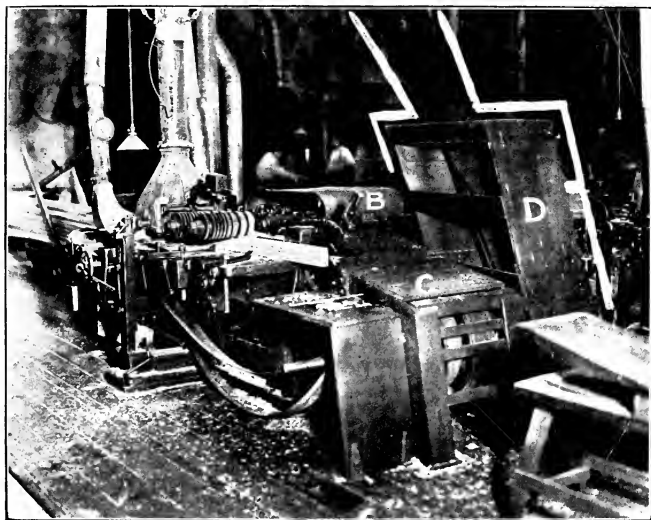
Illustration No. 25. Wood sticker machine with exhaust system. Drive belt and pulley are guarded.
